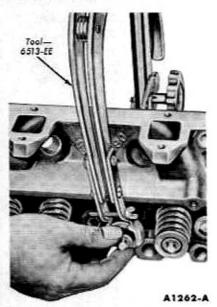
Valve Spring Retainer Locks Removal or Installation
